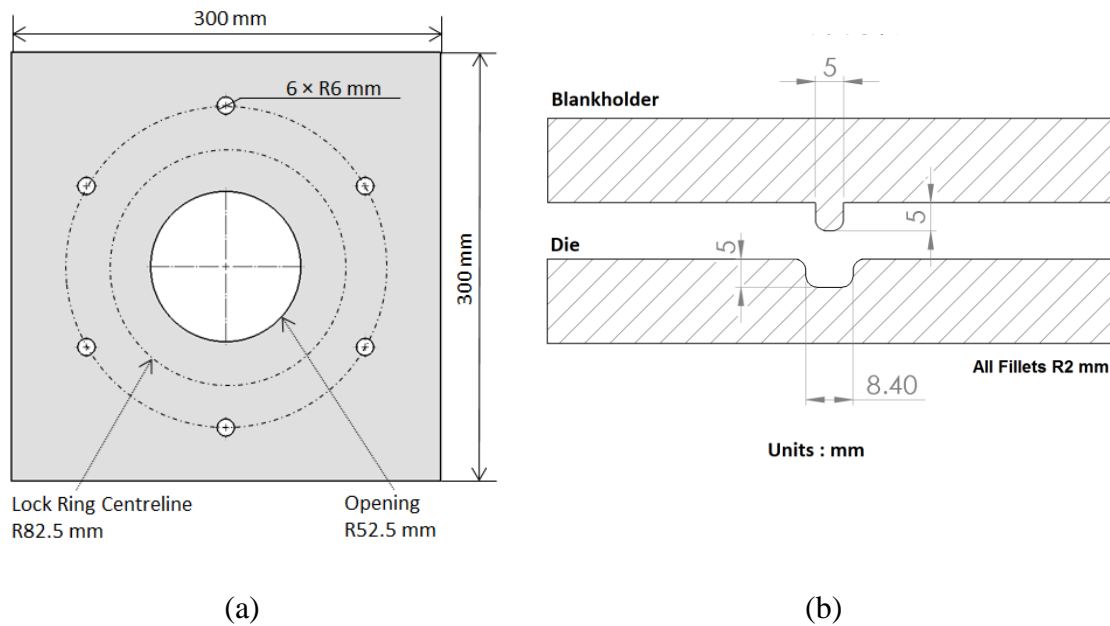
(a) Schematic drawings of the custom-built blank holder; (b) Drawing of the lock ring design
